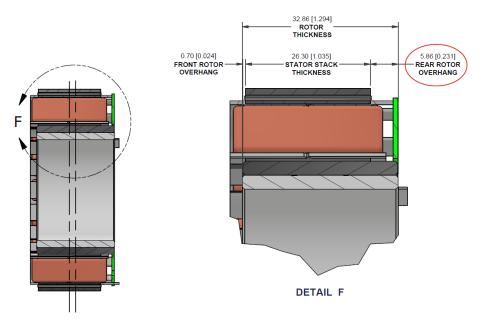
Detail view of Alternative Rotor to Stator Alignment on Hall-sensor Motor version
